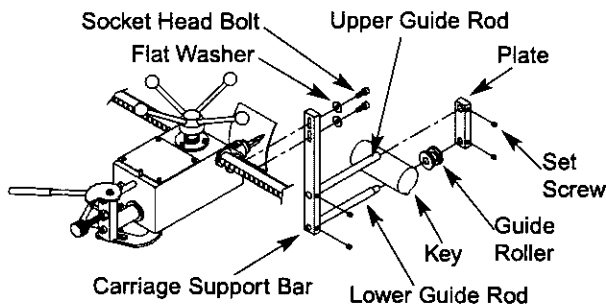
Attach Carriage Support to Carriage (Model 24952)
